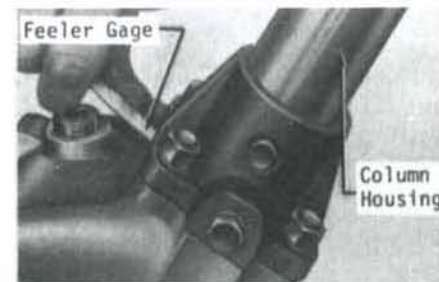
Measuring clearance between gear housing and steering column housing to determine shim and gasket thickness needed. Shim and gasket thickness required between gear housing and side cover is determined in similar manner.
